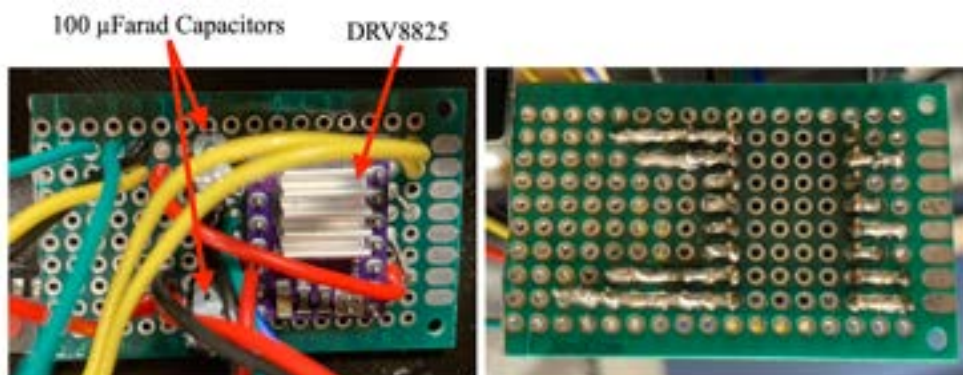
Figure X. Solder board. The image on the left shows the top face of the solder board populated with the DRV8825, two 100 μ Farad capacitors, and wire connections. The image on the right shows the bottom face of the solder board with the ties for each row of connections.
